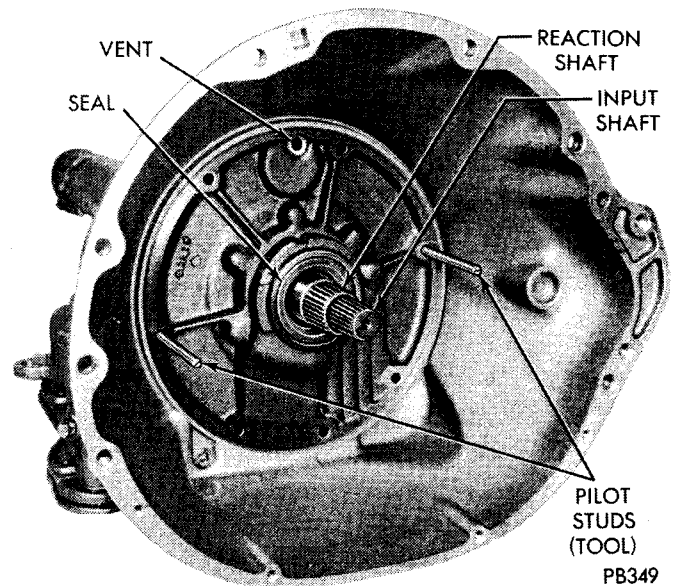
Installing Pump and Reaction Shaft Support Assembly
